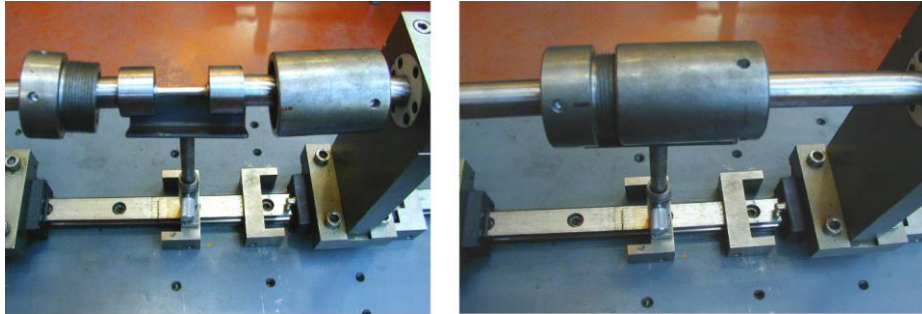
External interruption fixture when (a) unscrewed to insert the damping rings or access the specimen and (b) when screwed.
